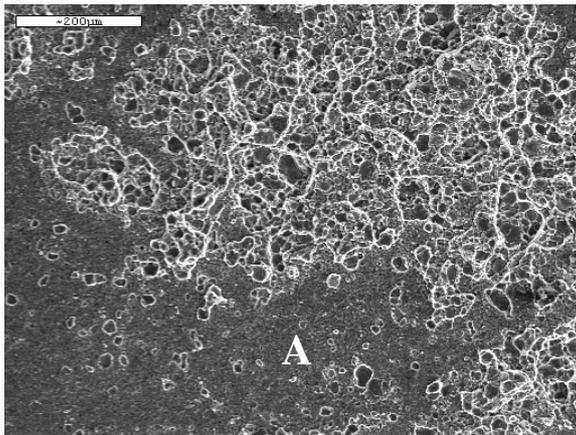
Tensile test fracture topography of butt welded joint for investigated AMCs reinforced with 5 % of Ti_3Al
